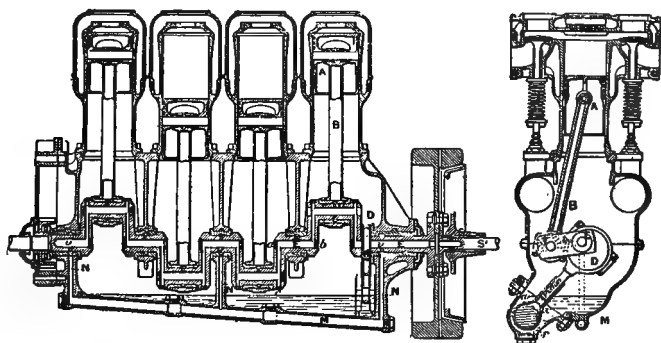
Section Through Four Cylinder Motor, Showing Lubricating System.
